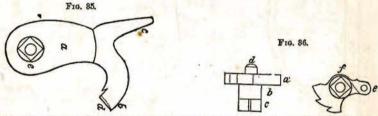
Hammer, half size. a, body; b, head; e, comb; d, countersink, slit, and knife-edge; e, tumbler-hole.
